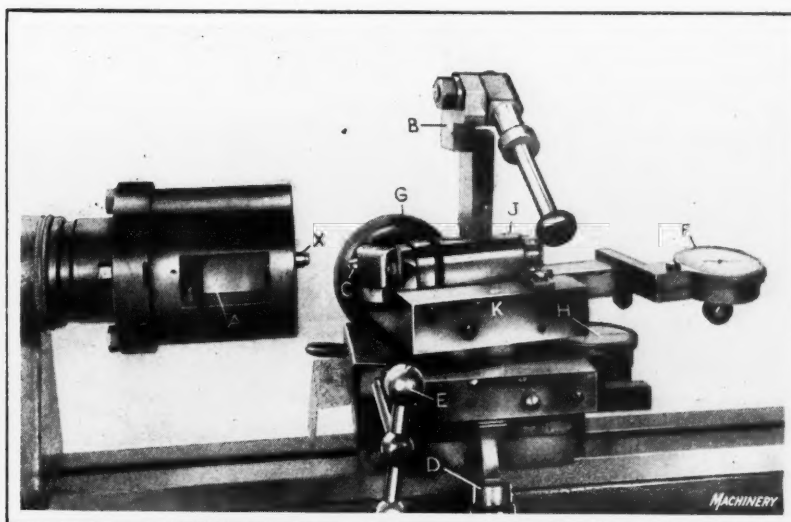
Equipment employed for accurately turning a Taper Axle and facing an Adjacent Shoulder
